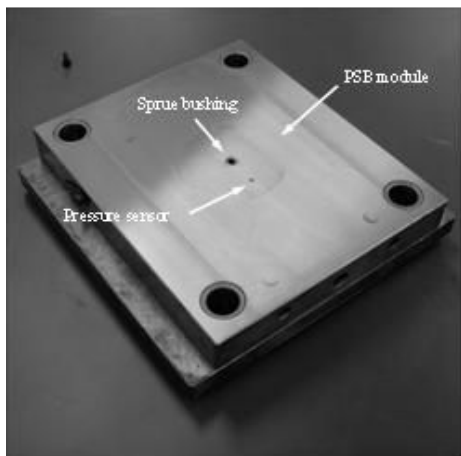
Photograph of the PSB module assembled with the fixed half of the test mold
